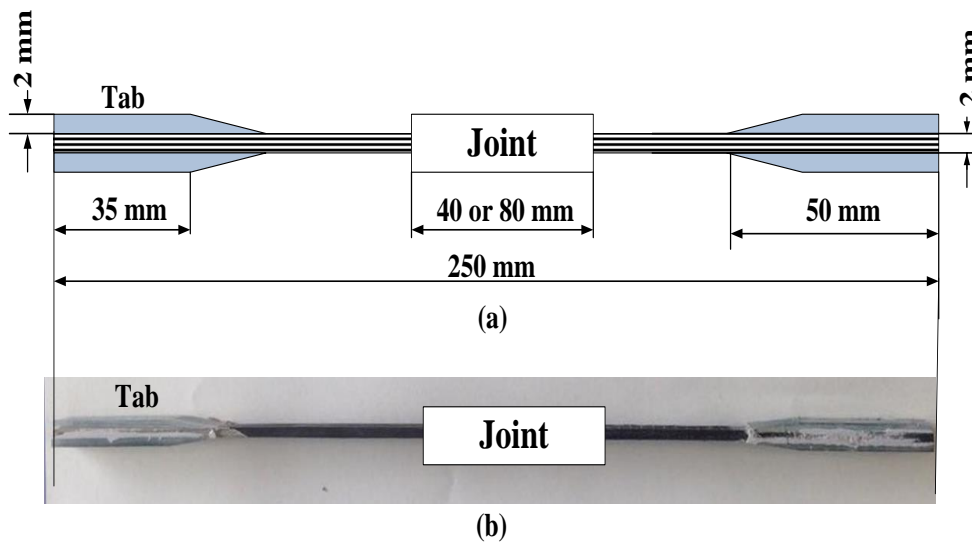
4: Standard specimen dimensions used for tensile testing and (b) an image of a specimen used in a tensile test
